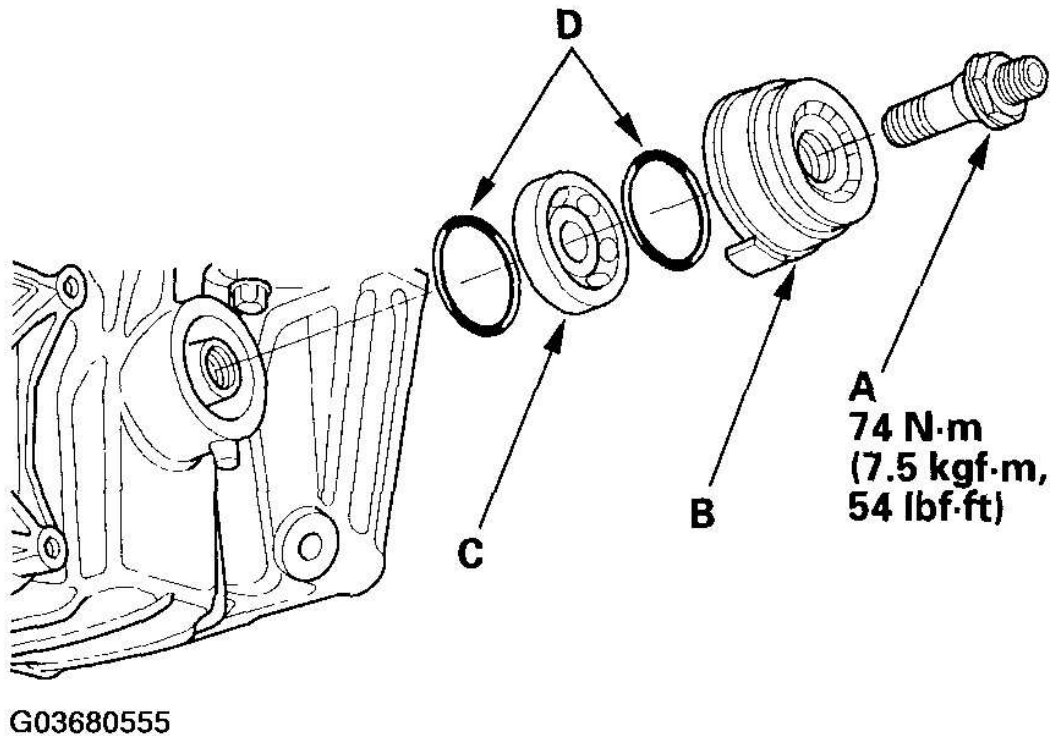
Removing Oil Cooler Center Bolt, Oil Cooler, And Oil Filter Base (2000-2003 Models)
